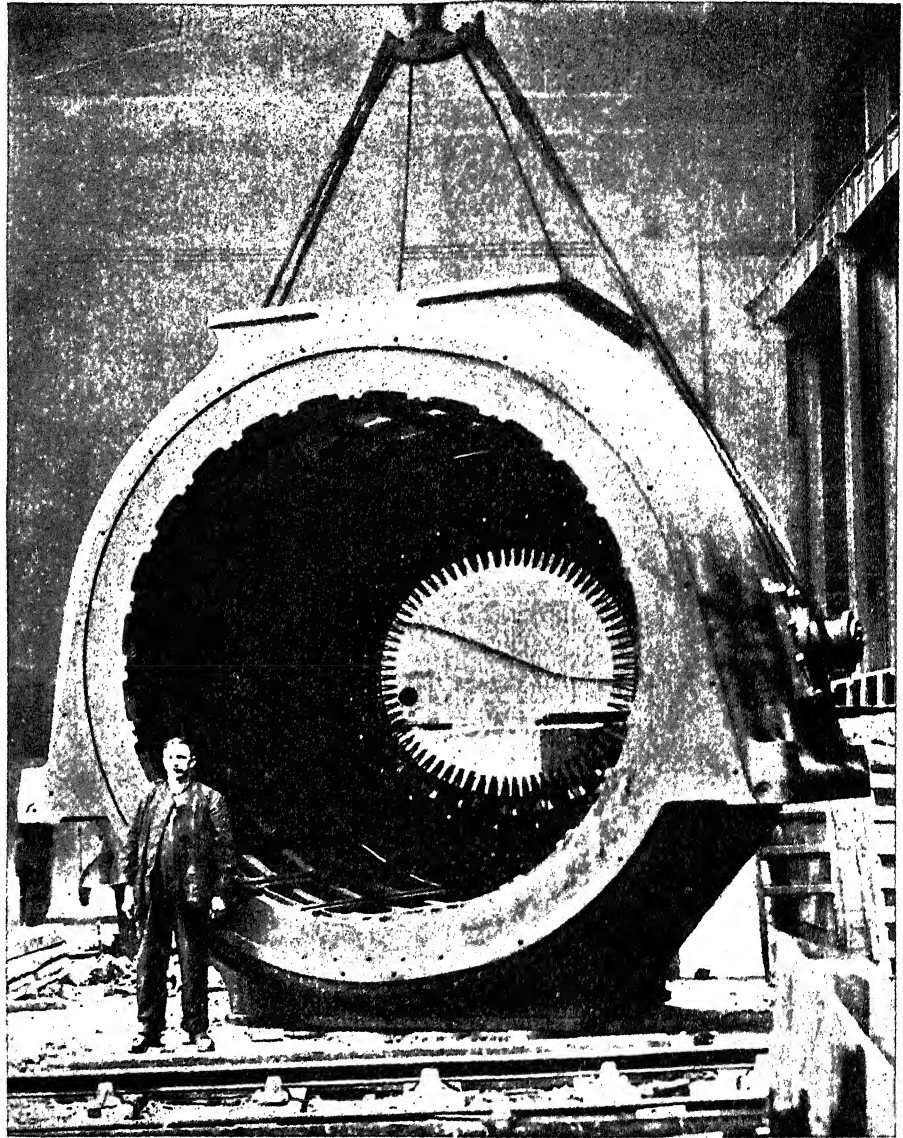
Stator Shell of 20,000-kw. Turbo-alternator, single casting, weight 28 tons, showing steel trunnion pins for turning casting on end
